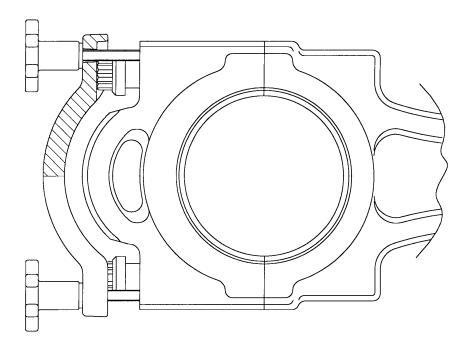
CONNECTING ROD CAP REMOVAL TOOL - TYPICAL (C-2106)
